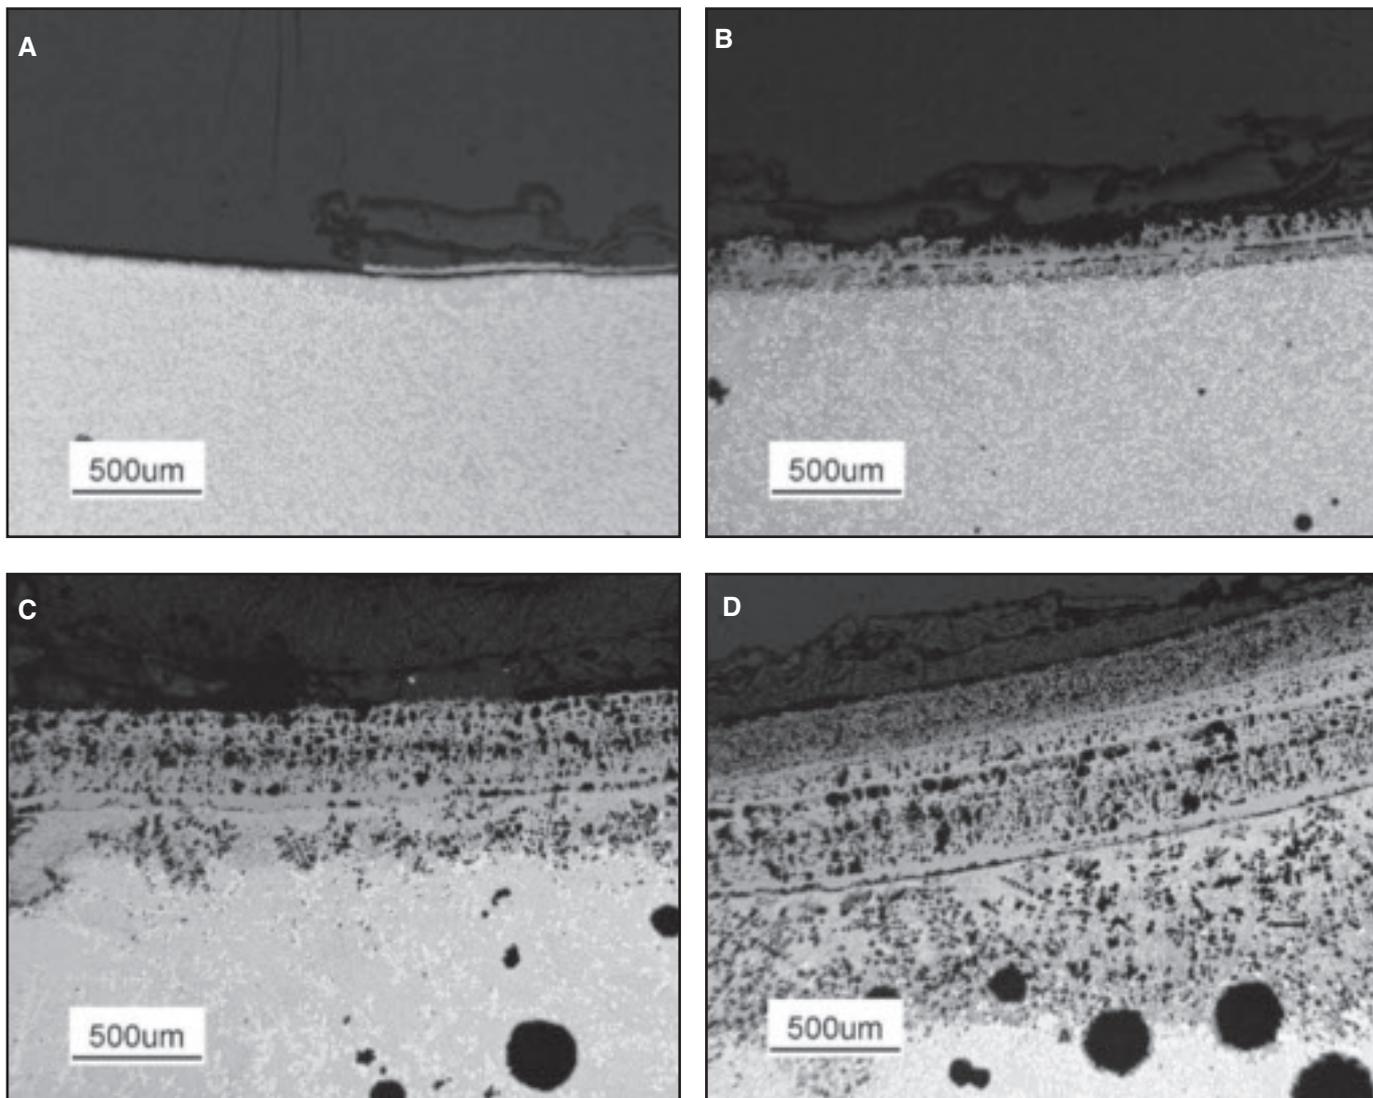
Simulated brazed transformer joint fabricated by torch brazing electronic-grade C11000 copper plate with Cu-6Ag-6.1P braze alloy after exposure to water containing 160 ppm sulfide at 60°C. A — 1 week; B — 2 weeks; C — 3 weeks; D — 5 weeks.
